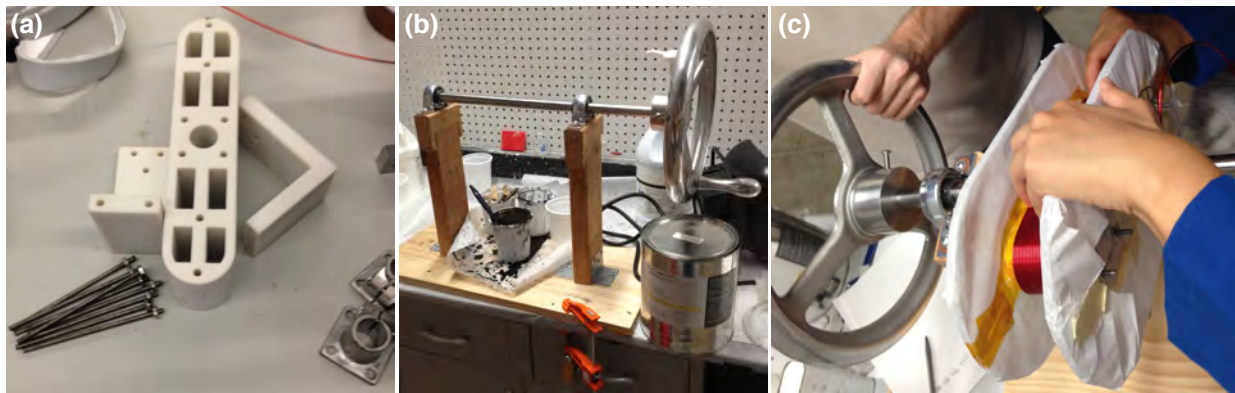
1/8th Size Prototype Winding. (a) Components for coil winding former and final mechanical assembly. (b) Assembled coil winding rig. (c) Coil winding process using winding assembly.
